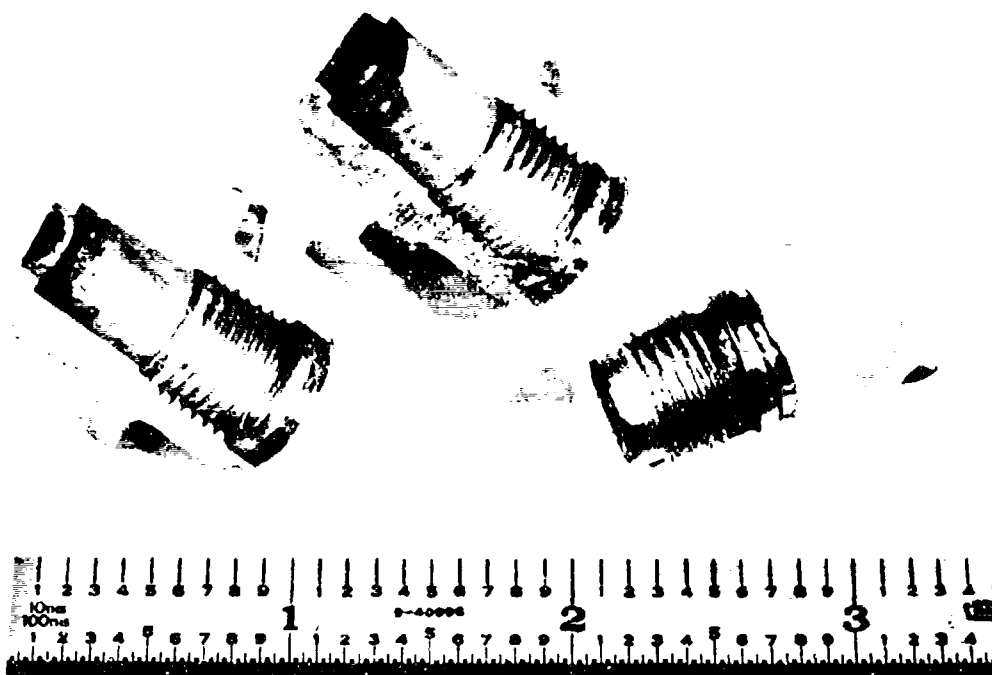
Header and Sectioned Initiator Body Showing Internal Corrosion of Cadmium Plated Steel
